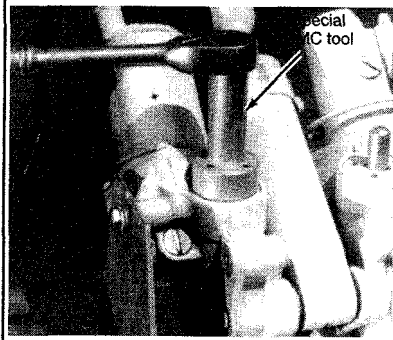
Use a special tool or spanner wrench to remove the end cap...
